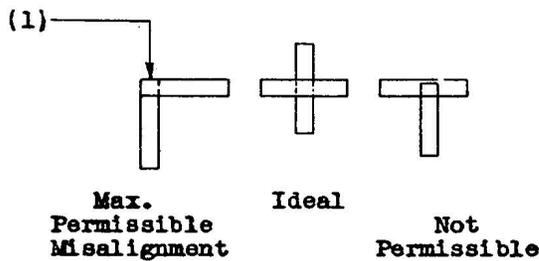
Fig. K - Alignment of Light Contacts - Plan View of Contacting Surfaces
